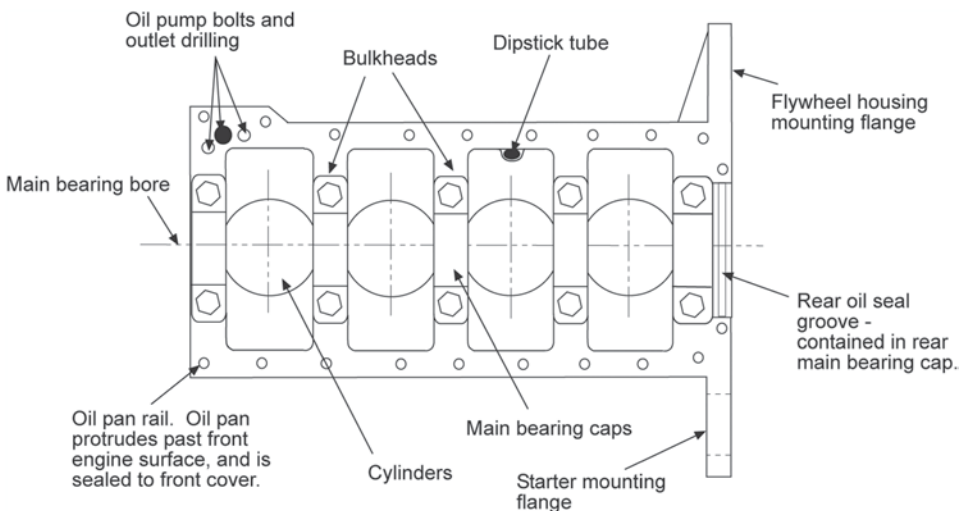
Bottom view of the crankcase of an in-line engine
